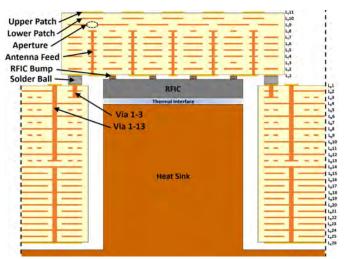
Cross section of assembled tile and carrier organic PCB stack-up.
